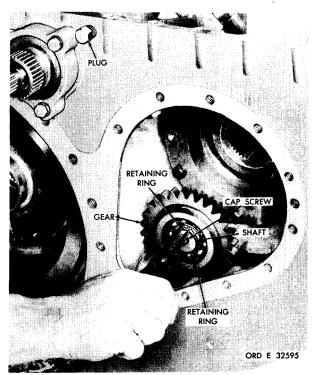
Removing (or installing) snap ring which retains brake collant pump idler gear
